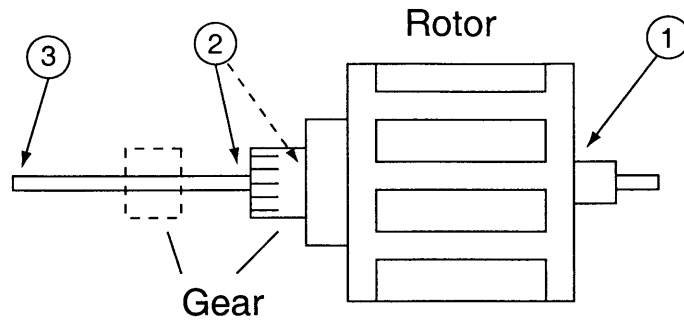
Sketch of a motor shaft, labelling where runout measurements were taken. The dotted line represents the gear and measurement locations for motors 692 and 693.
